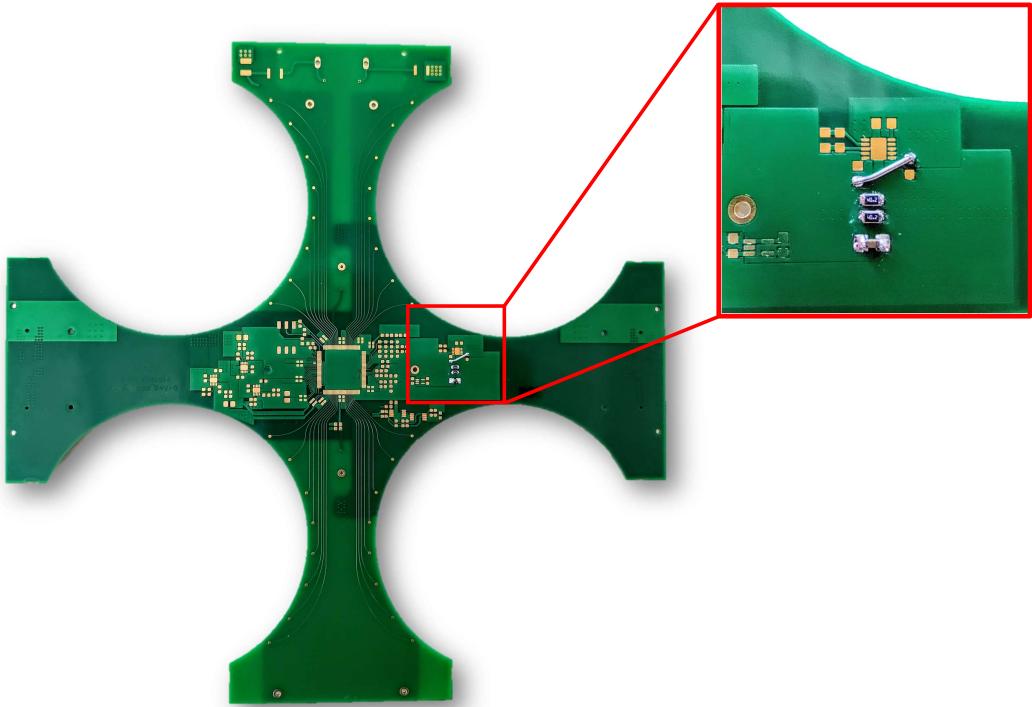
Dummy-1 front-end board with a detailed view of the soldered components.
